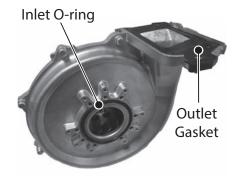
Install inlet O-ring and outlet gasket to new fan assembly
